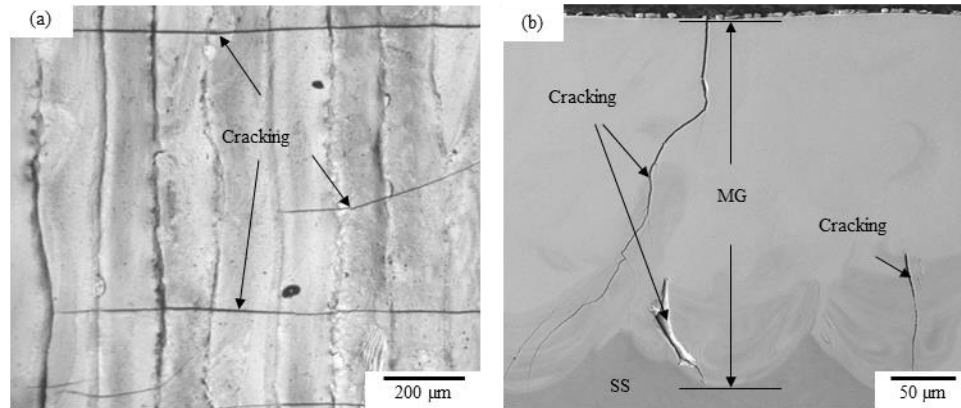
The direct SS–MG joint: (a) OM image of the weld surface; (b) secondary electron image of the transverse cross-section.
